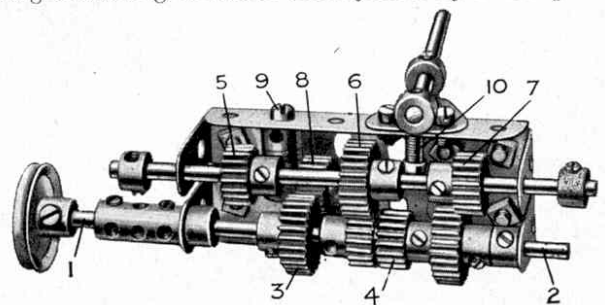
One of the smallest three-speed and reverse gear-boxes yet constructed from Meccano parts.
